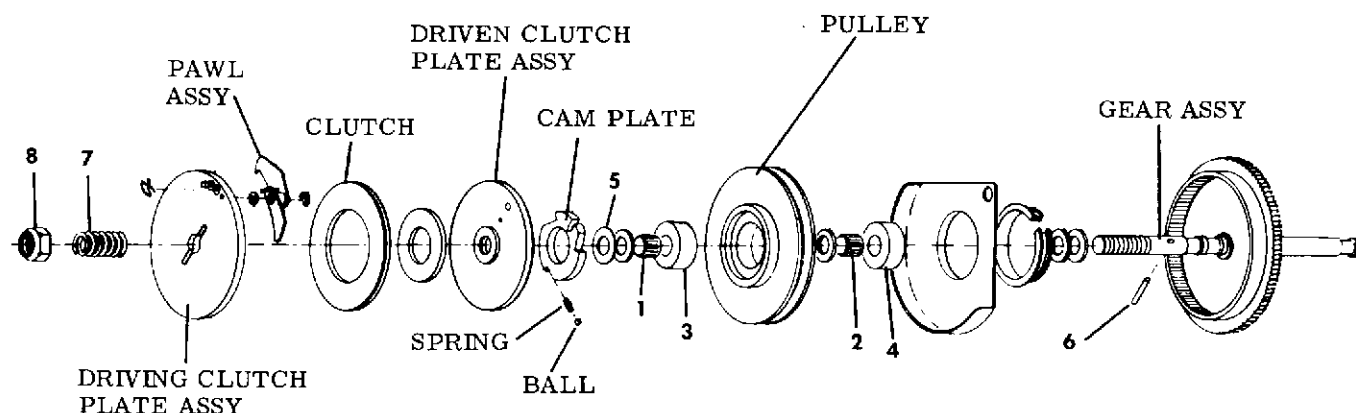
FILM FEED CLUTCH ASSEMBLY
